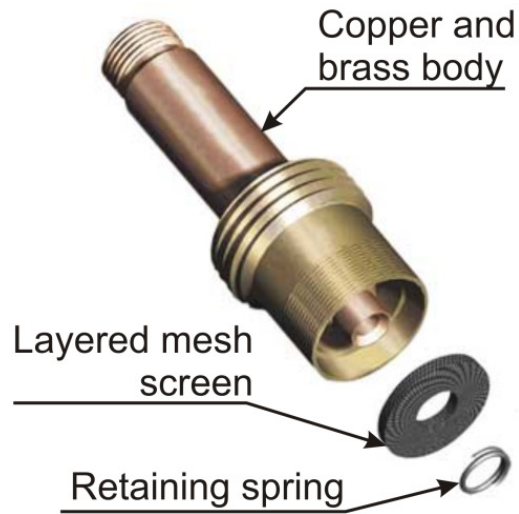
Exploded diagram showing a typical GTAW gas lens (taken from Miller Electric [75]).
